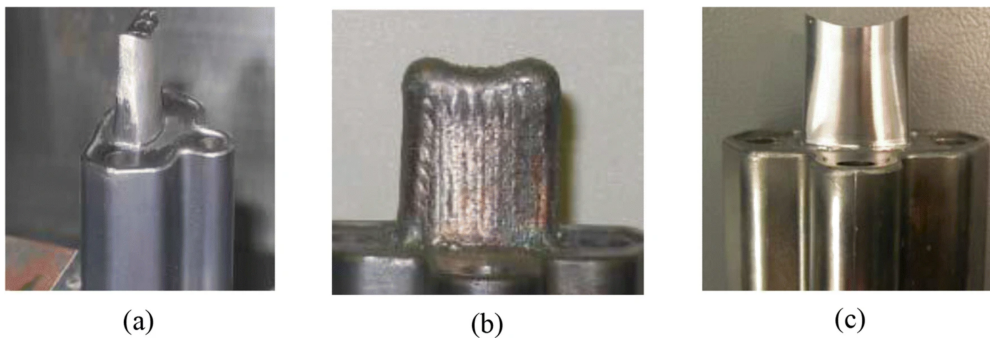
Hybrid repair technique of a damaged die (a) by combining additive manufacturing (b) and machining (c) [31].
